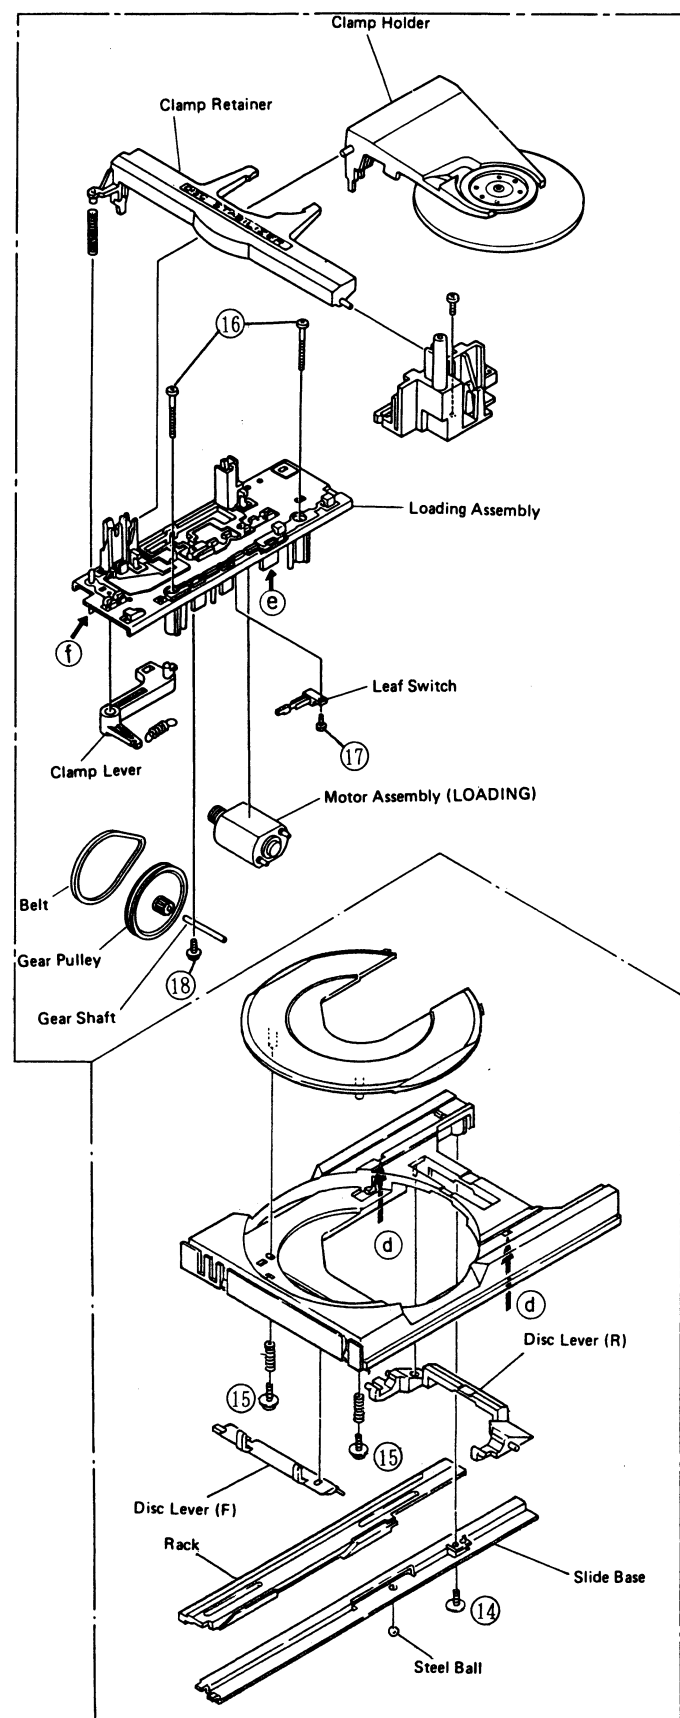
Parts disassembly (Loading mechanism and Tray assembly section)
